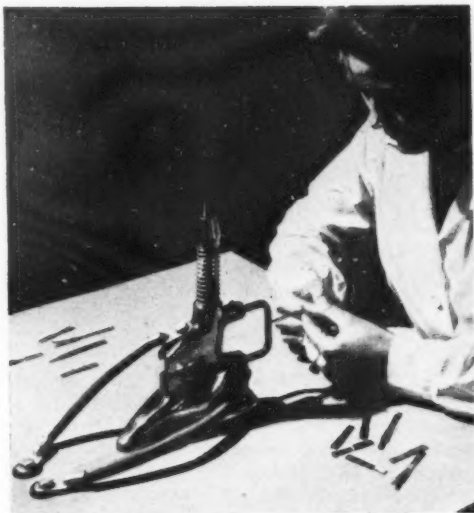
Close-up View of the Welding-head and Work-table of the Sciaky BSF.1 Spot-welding Machine seen in Fig. 1
